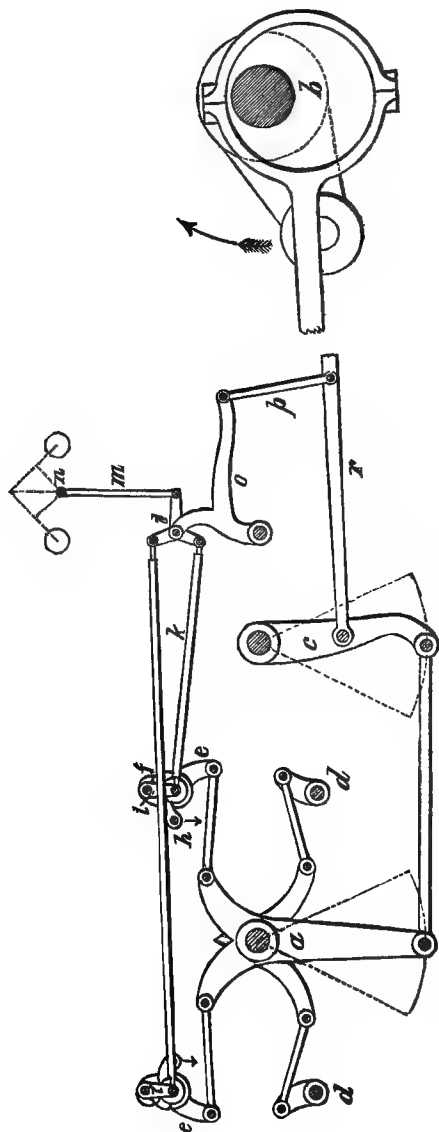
Fricart's releasing valve gear. General arrangement.
